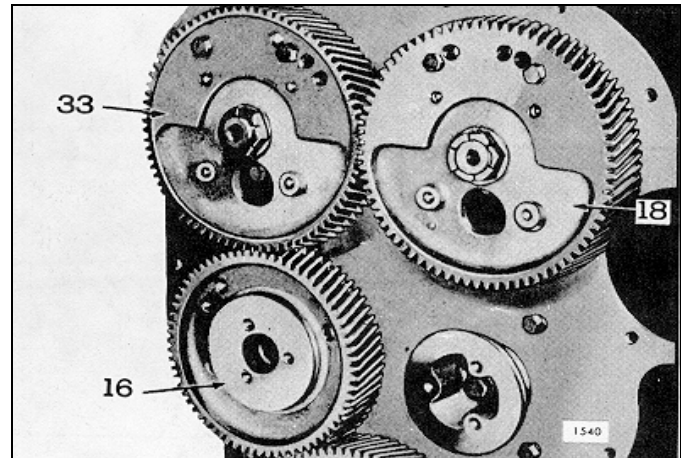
Camshaft and Balance Shaft Gear Mounting
